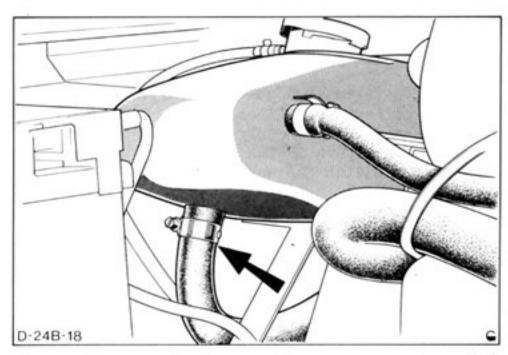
Tank outlet hose to heater return hose 'T' connector.
